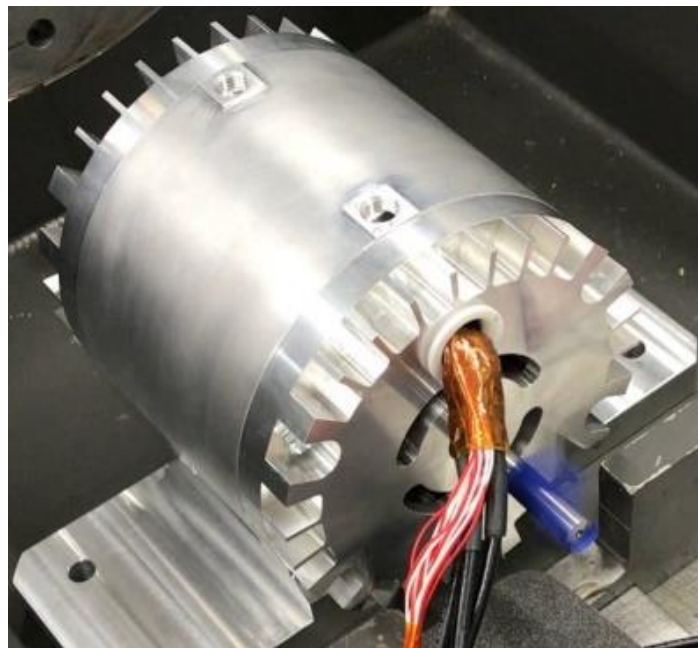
Photo of the assembled prototype DLCW 6/4 FSPM prototype motor
